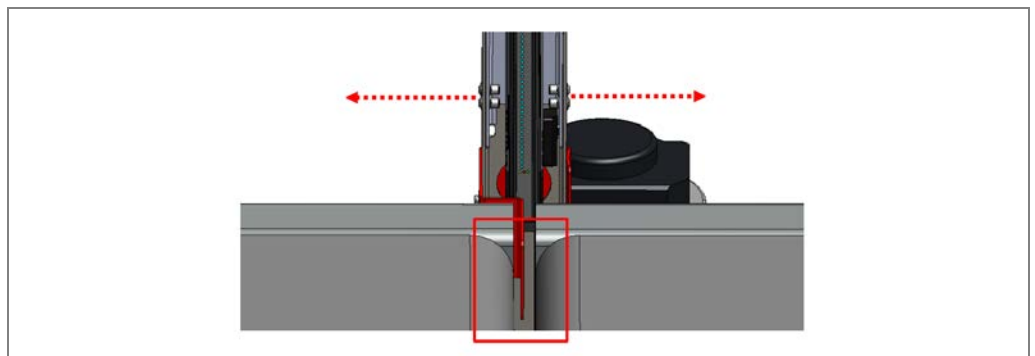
Steel frame: making sure the light beams fall on the center of the conveyor
